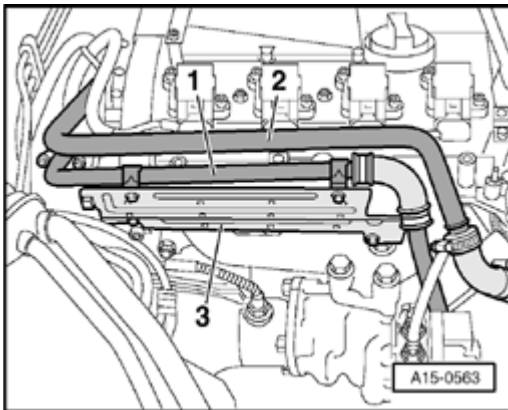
Pulling Front Hose Off Crankcase Breather Line, Front Hose Off Line To Secondary Air Combination Valve & Removing Heat Shield
